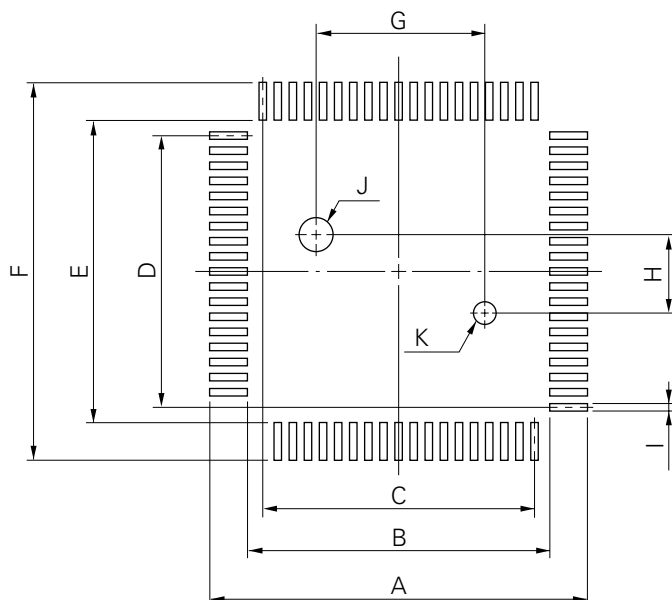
Conversion Socket (EV-9200G-74) Package Drawing (Reference)
